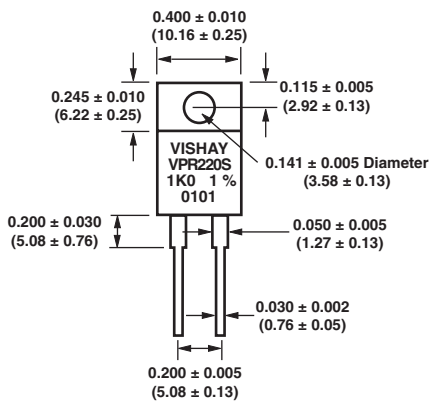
VPR221S DIMENSIONS in inches (millimeters)
